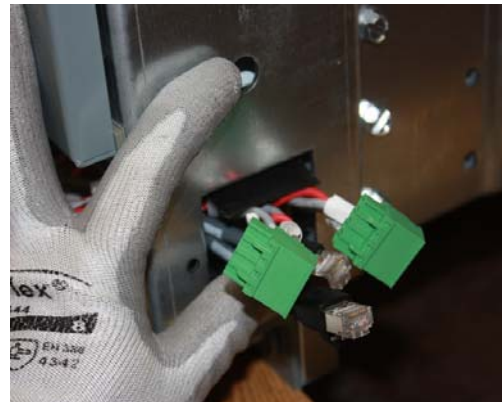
ULP Cables routed and connected to labeled ULP ports in adjacent section wireway
